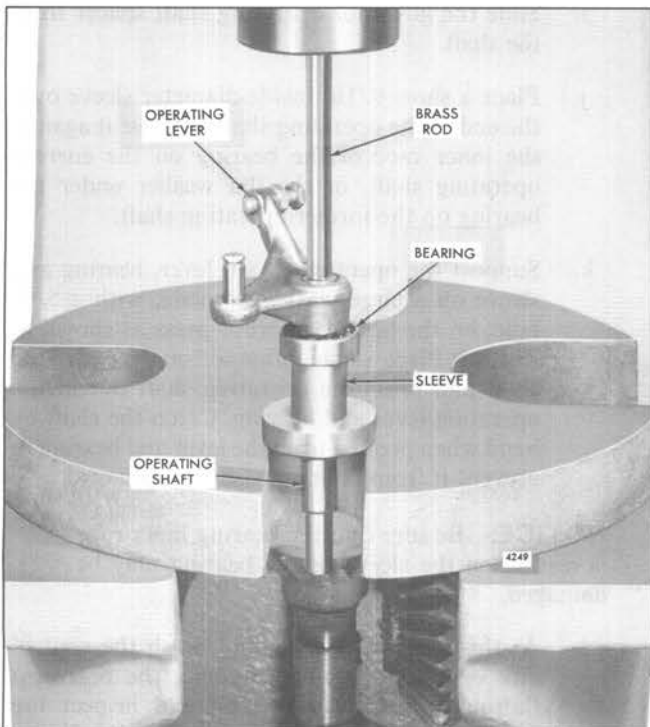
Removing Operating Lever and Upper Bearing from Operating Shaft
